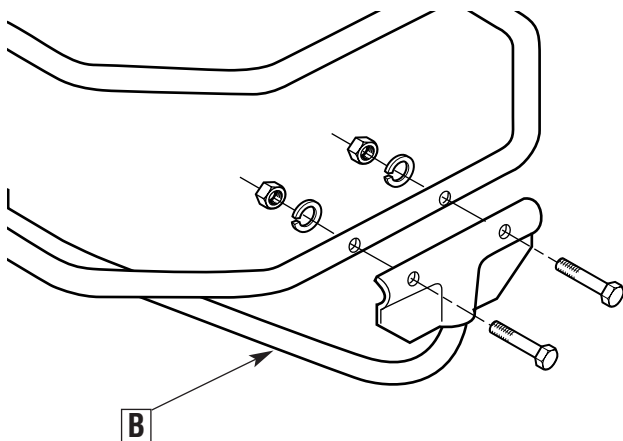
REMOVE BOTTOM BRACE HARDWARE
